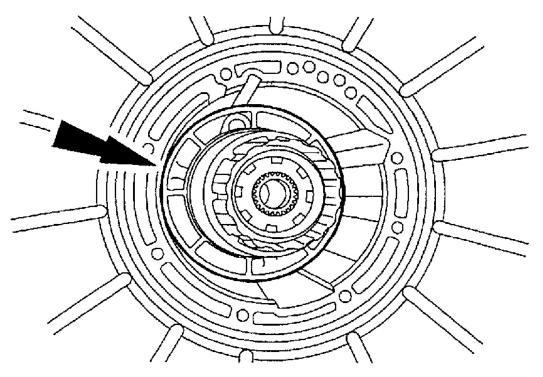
Removing Overdrive Brake & Coast Clutch Drum
